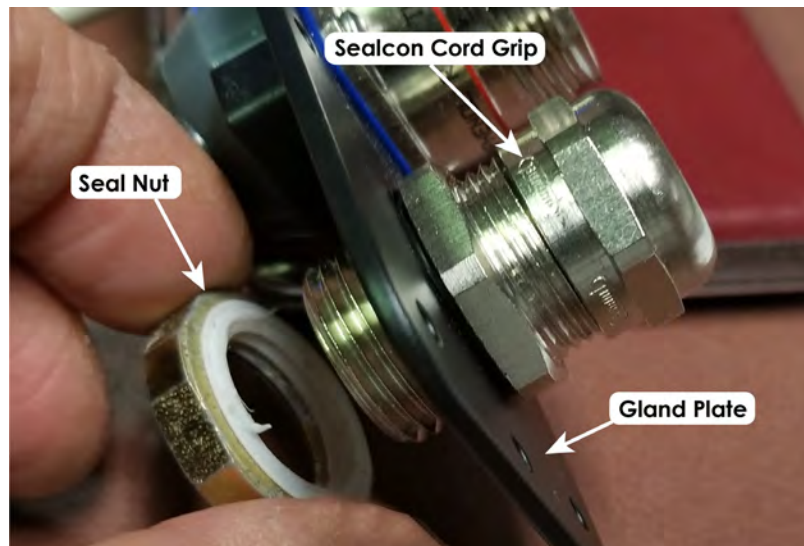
Removing Cord Grip Seal Nut/Removing Seal Nut
